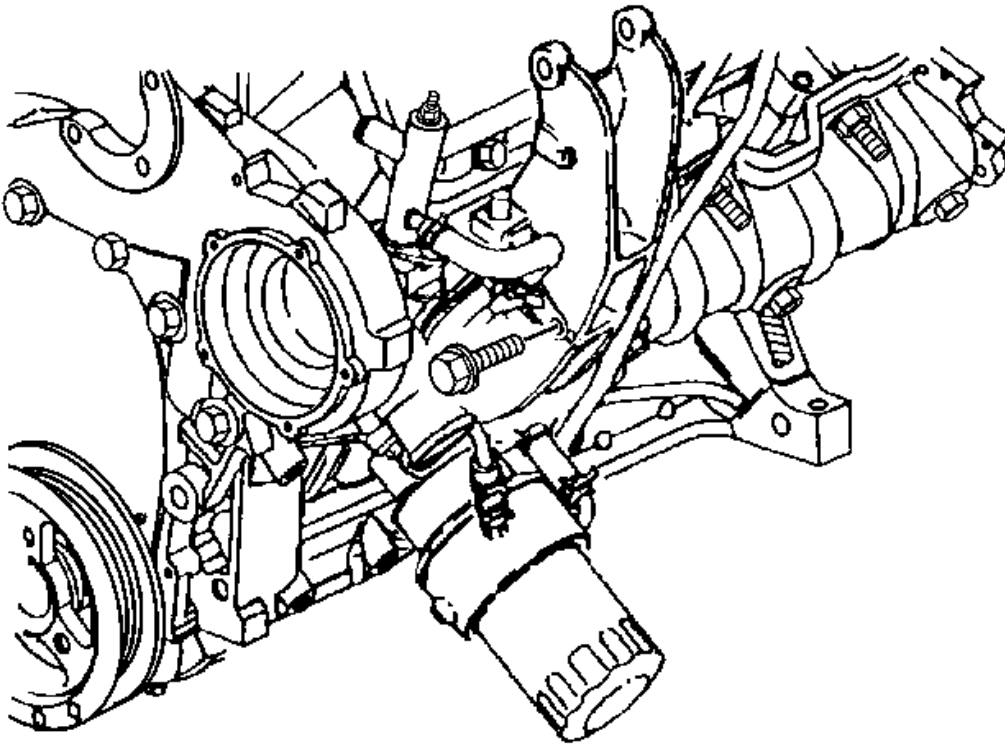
Identifying Engine Mount Strut Bracket Bolt
